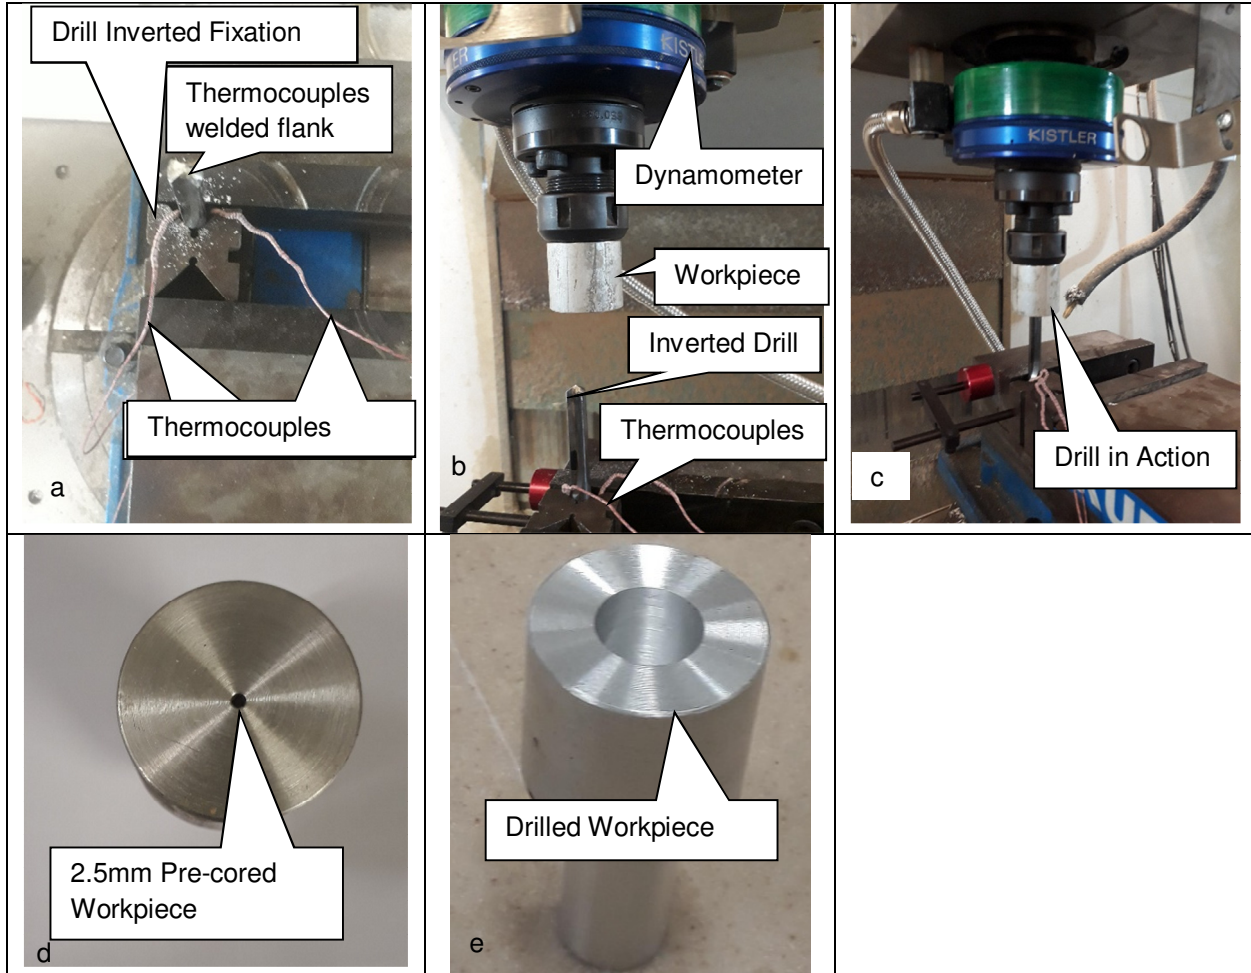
a) Inverted drill with fixed thermocouples b) Inverted drilling setup d) Photograph of drilling experiment d) Pre-cored Workpiece e) Drilled Workpiece
